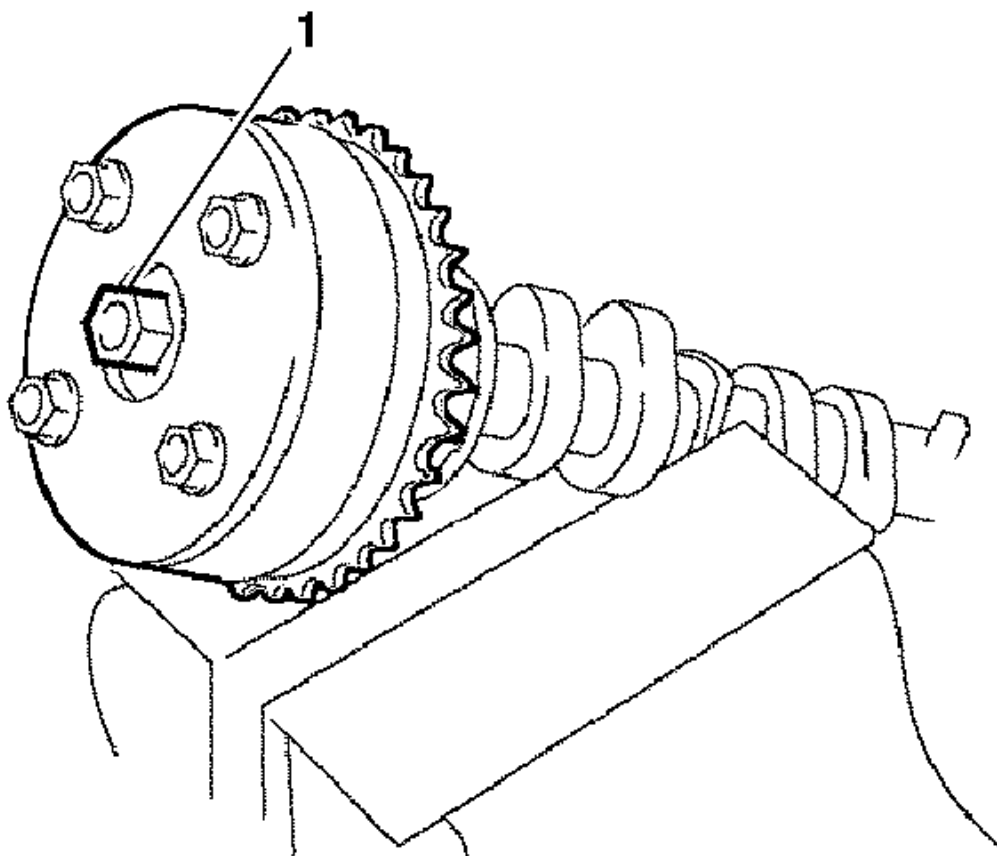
View Of Camshaft Timing Gear Flange Bolt
